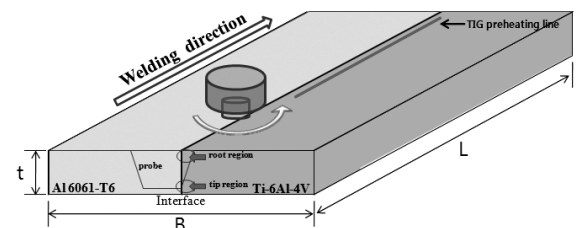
Schematics of GTAW assisted FSW hybrid welding
